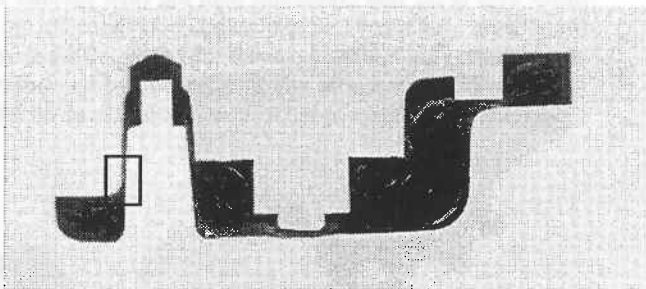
section A; slots and a cylindrical hole (scale 1:1)
